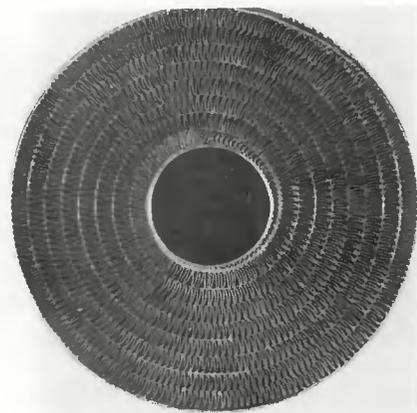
Specimen of rotating heat exchanger used in brazing tests
